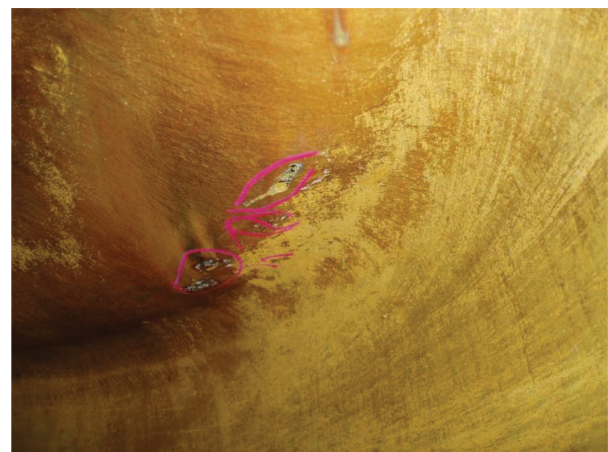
Pitting corrosion of the casing of a HP booster pump (cast duplex stainless steel 1.4468).
